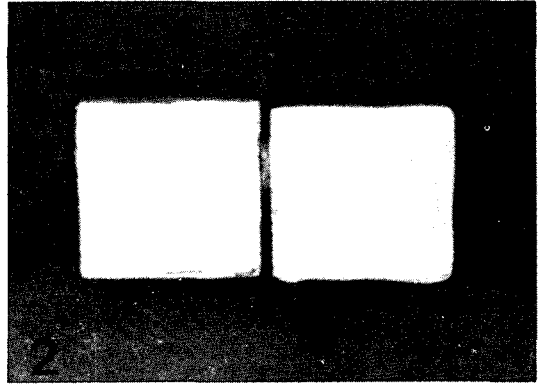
Photography showing cohesive & adhesive fractured specimens
